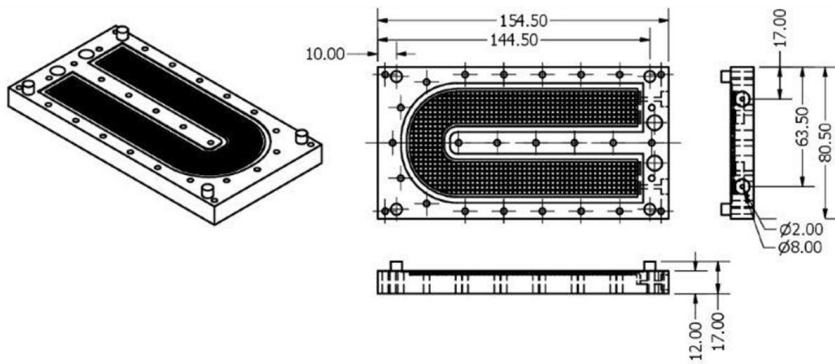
Construction drawing with dimensioning of the upscaled membrane module.
